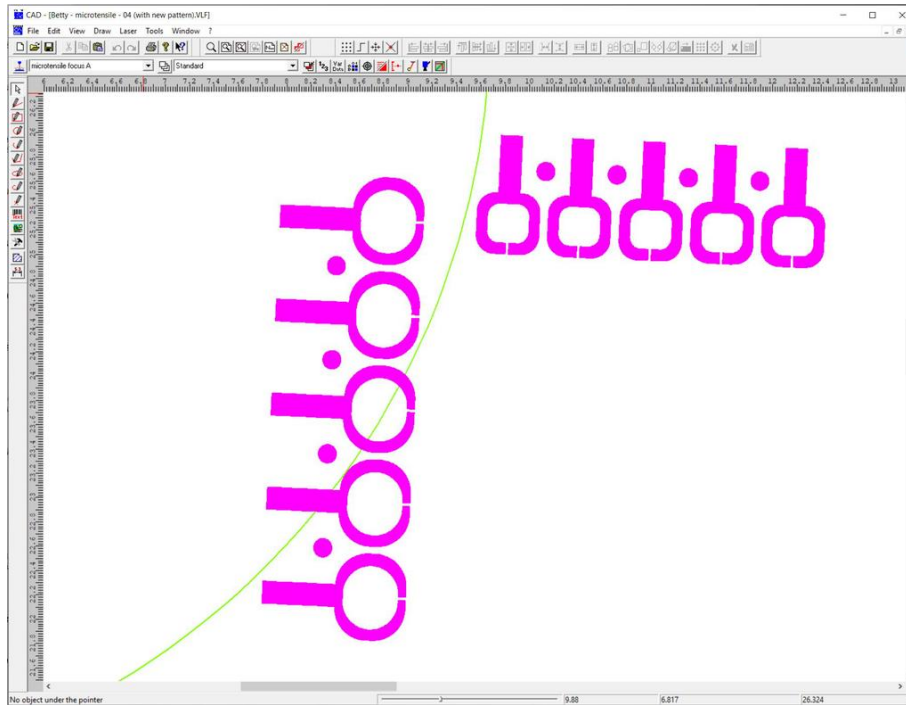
CAD drawing for fs-laser-machined 415 micro-tensile specimen cutouts of small gauge (left side) and large gauge (top side) tensile geometries. Image taken by *Travis Casagrande, CCEM (2023)*.
